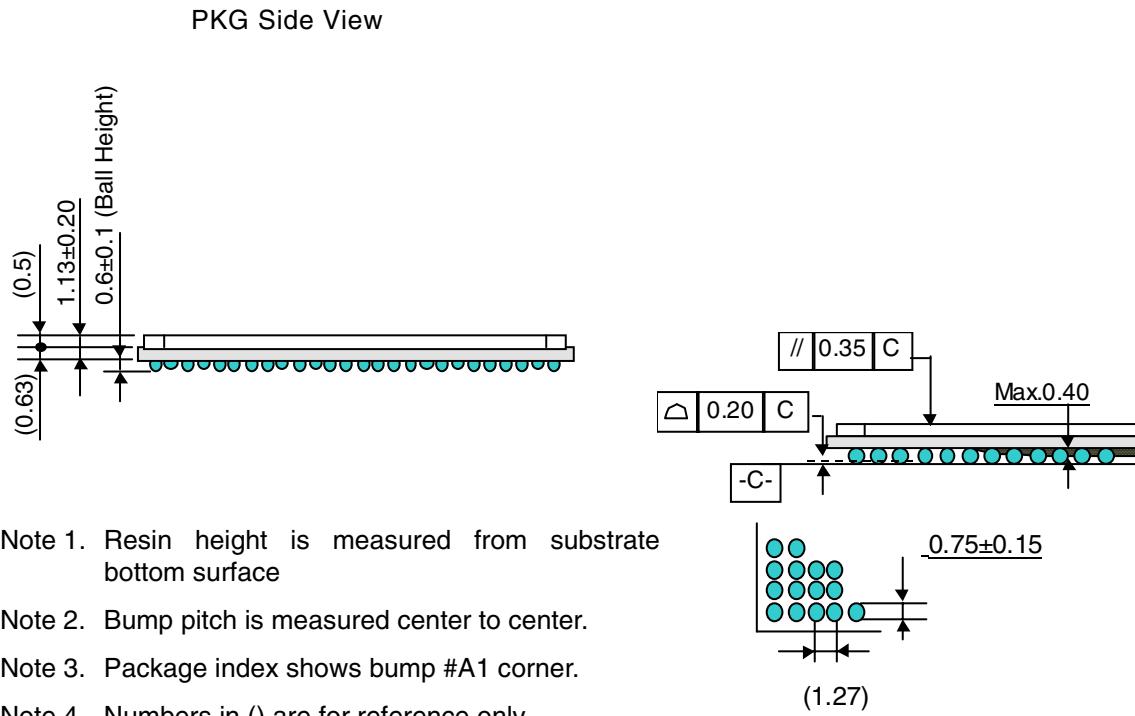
352 Pin BGA Outline and Footprint - Side Views
